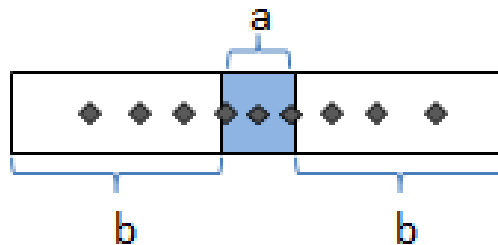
Schematic diagram shows hardness profile along welded plate (a) weld and (b) base metal
